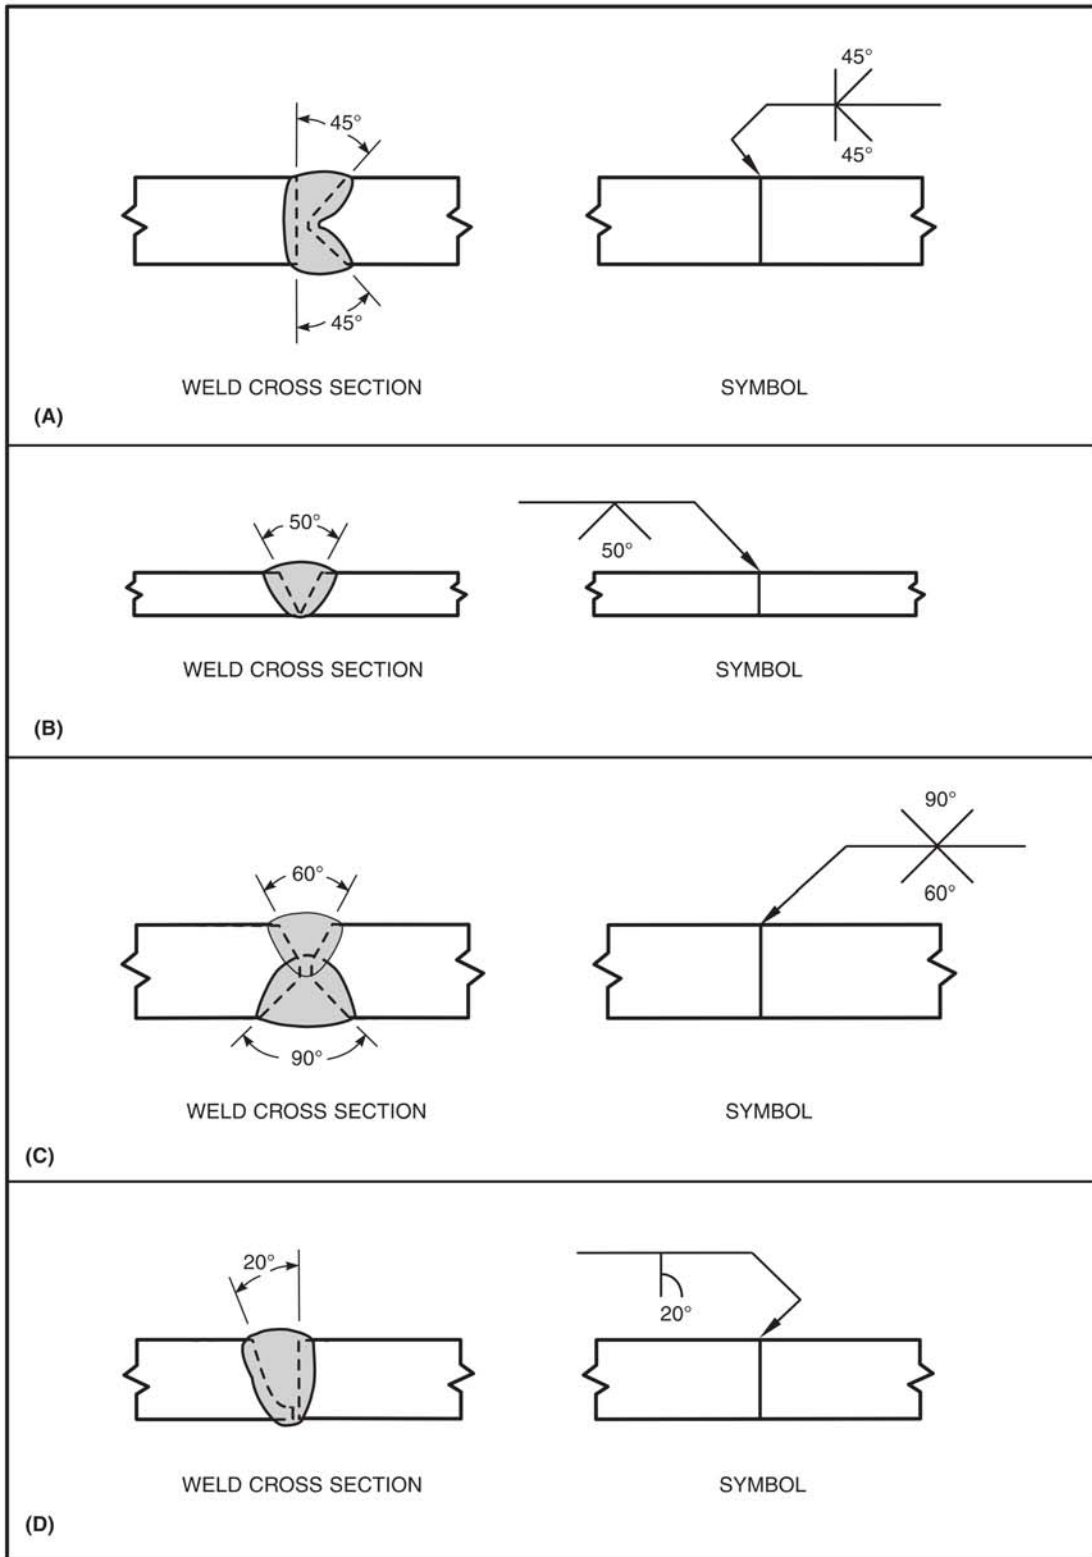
Application of the Groove Angle of Groove Welds
